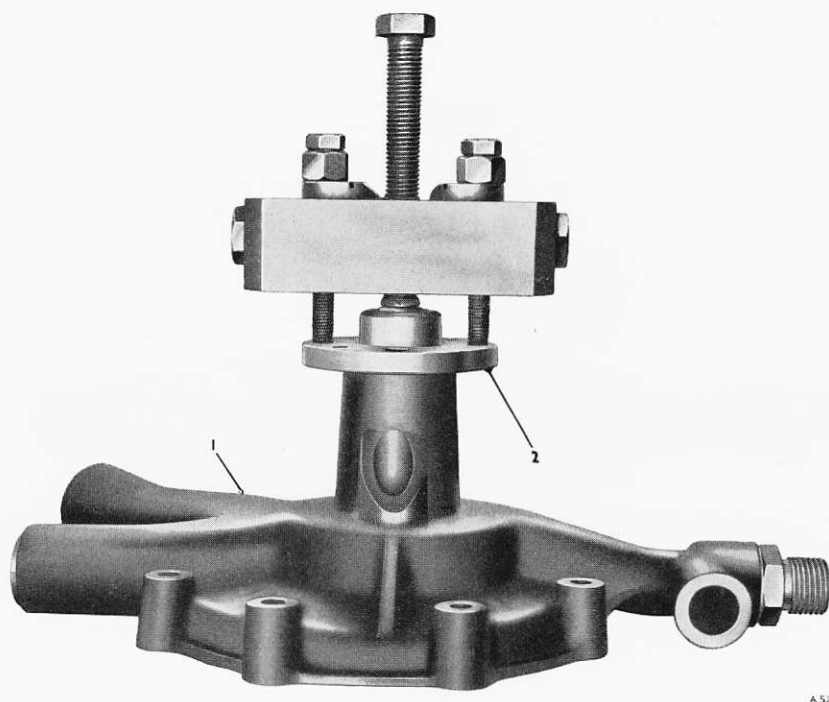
Extraction of adapter flange (Special tool RH.570)
